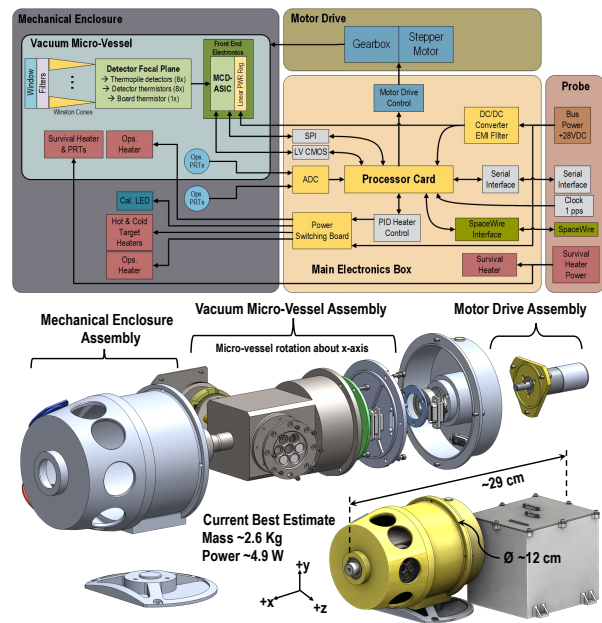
IG-NFR system block diagram and exploded mechanical view showing sub-assemblies.
